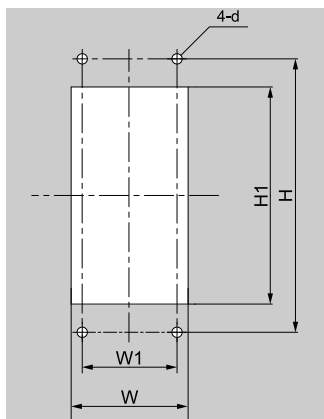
Panel Cut-Out Dimensions to Attach Inside Control Panel
